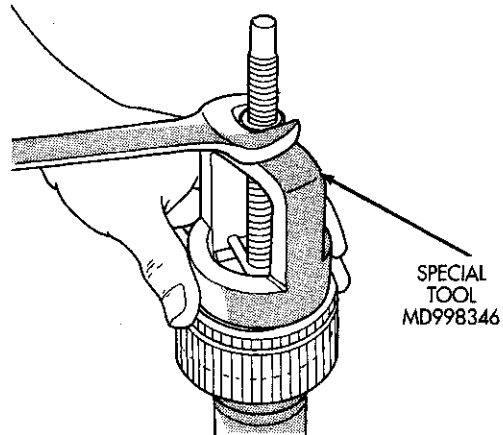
Tightening Puller Nut To Pull Bearing From Gear
